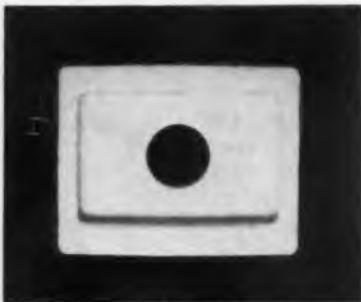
This part was molded with 2 of the required tolerances to size; then other tolerances—recessed area—were machined.
